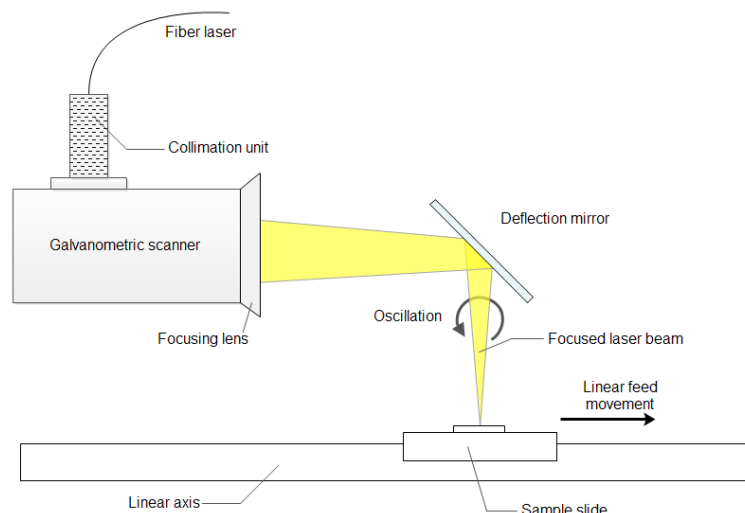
Schematic sketch of a laser welding setup [14]
